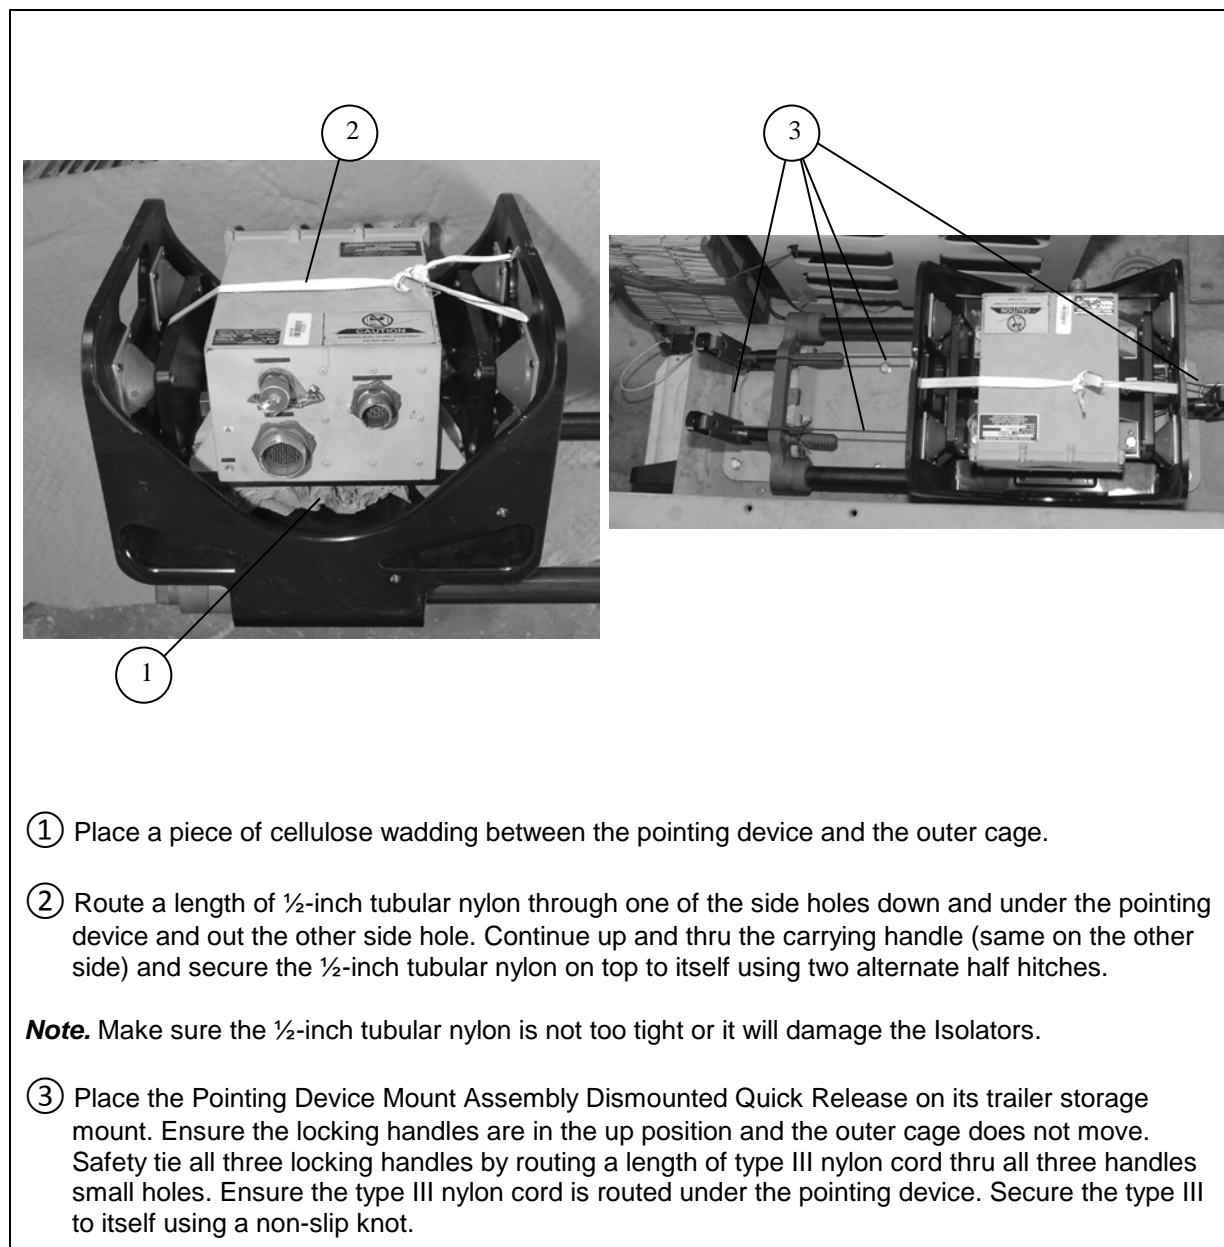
Pointing Device Mount Assembly Dismounted Quick Release Prepared and Secured
